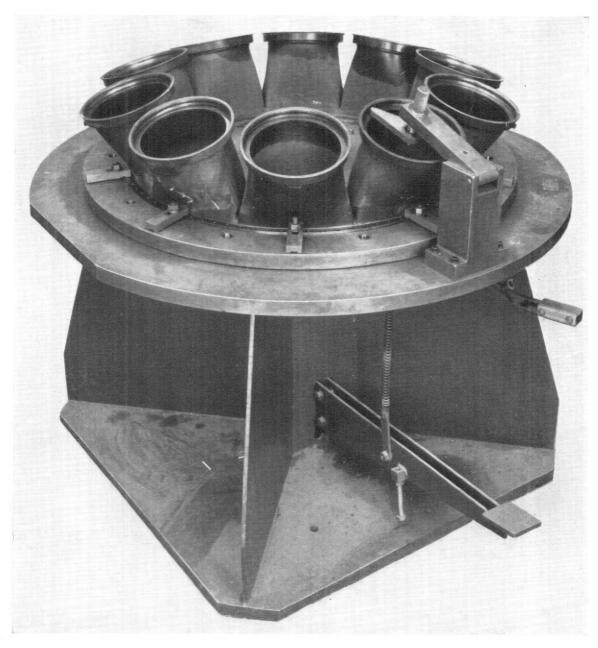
Discharge nozzle assembly mounted on checking fixture T.79434.
